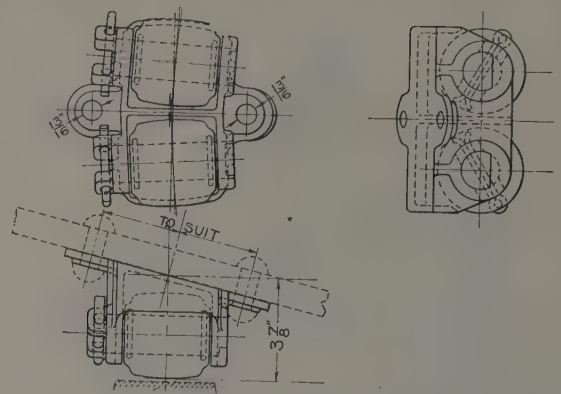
Economy Inverted Style Roller Side Bearing for Freight Service.
